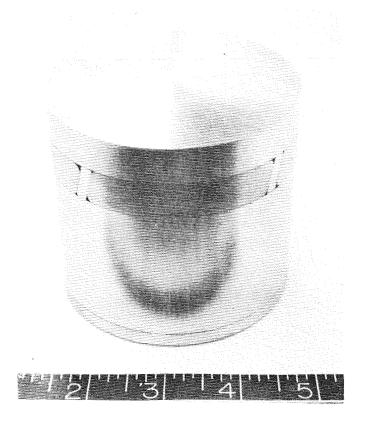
a. Assembly with Back Shroud and Lower Pressure Plate, and Cores
